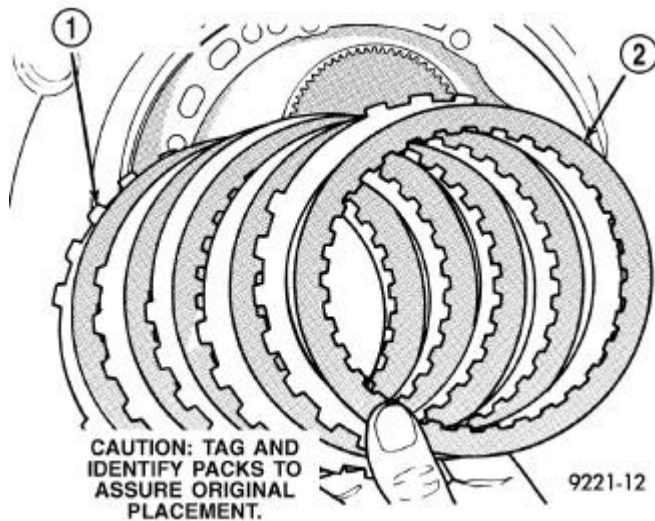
Remove/Install Low/Reverse Clutch Pack
